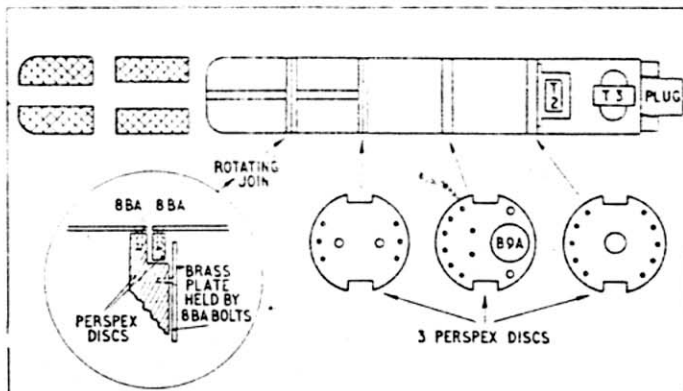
Basic details of the mechanical layout of the head assembly, with the rotating join shown in the insert
